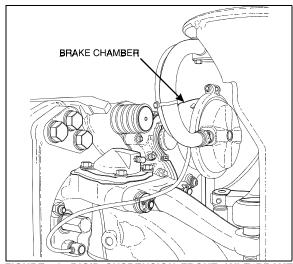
RIGID SUSPENSION FRONT AXLE BRAKE AIR CHAMBER 12158
